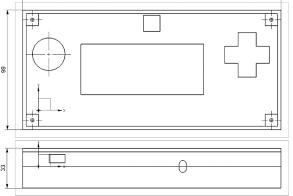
Controller Casing Technical Drawing (dimensions in mm)
